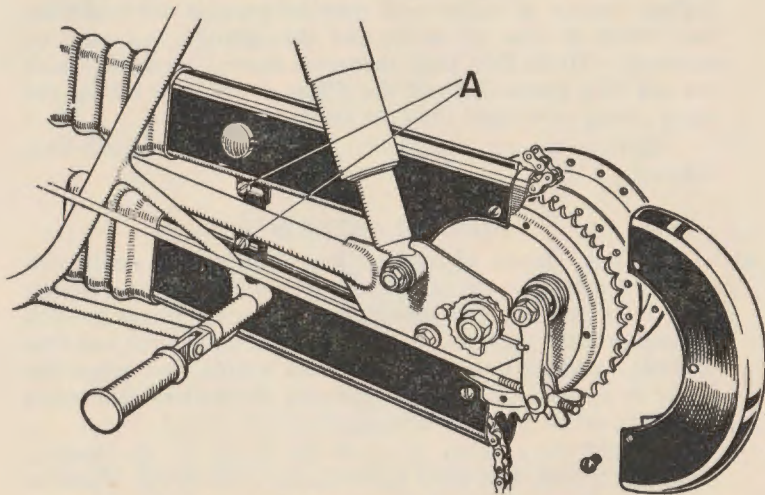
Rear Wheel Adjustment, showing movement of Rear Chaincase and detachable part of Chaincase “exploded.”
